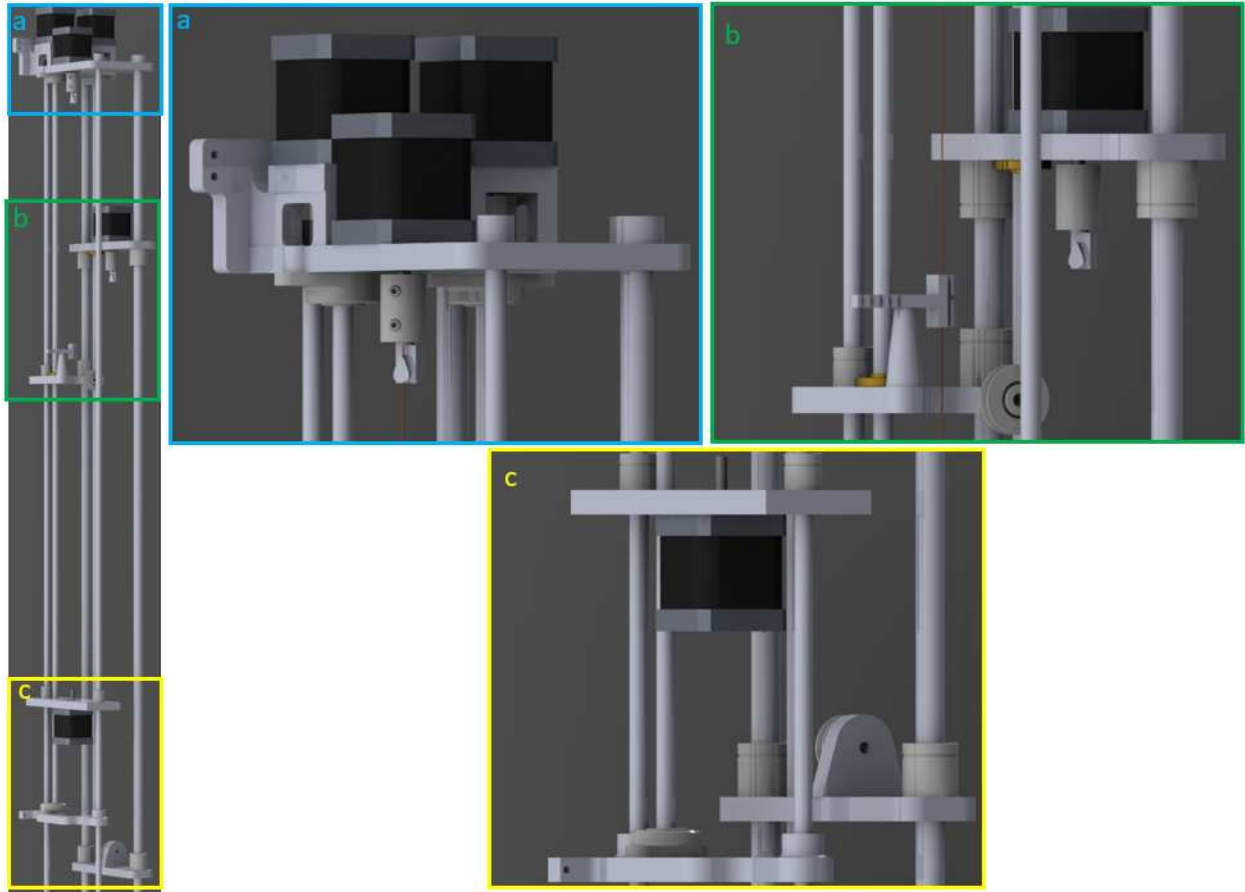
Detailed views of the TCA machine. (a) The upper assembly (b). The traveling motor and guide. (c) The lower motor and switchback pulley.
